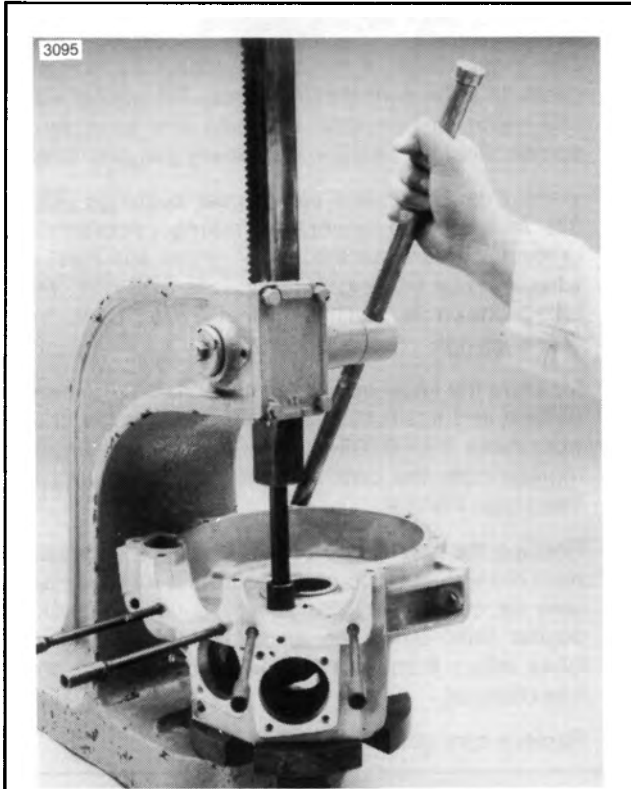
Removing and Installing Cam Gear Needle Bearing
